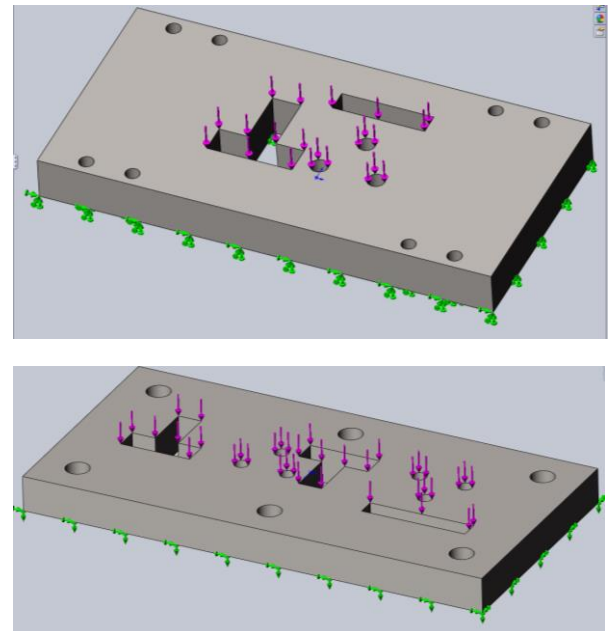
CAD models of die plates with cutting edges, SolidWorks2015®
